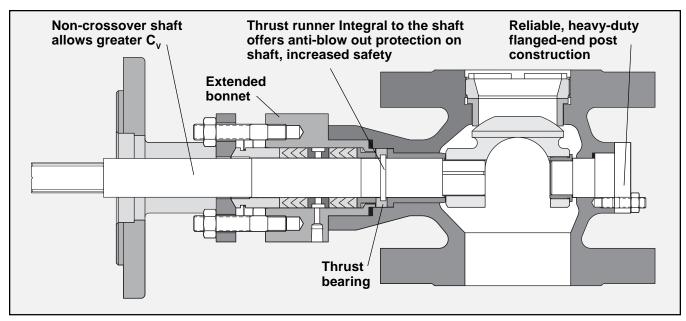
MaxFlo 3 Rotary Eccentric Plug Control Valve, Body Subassembly
